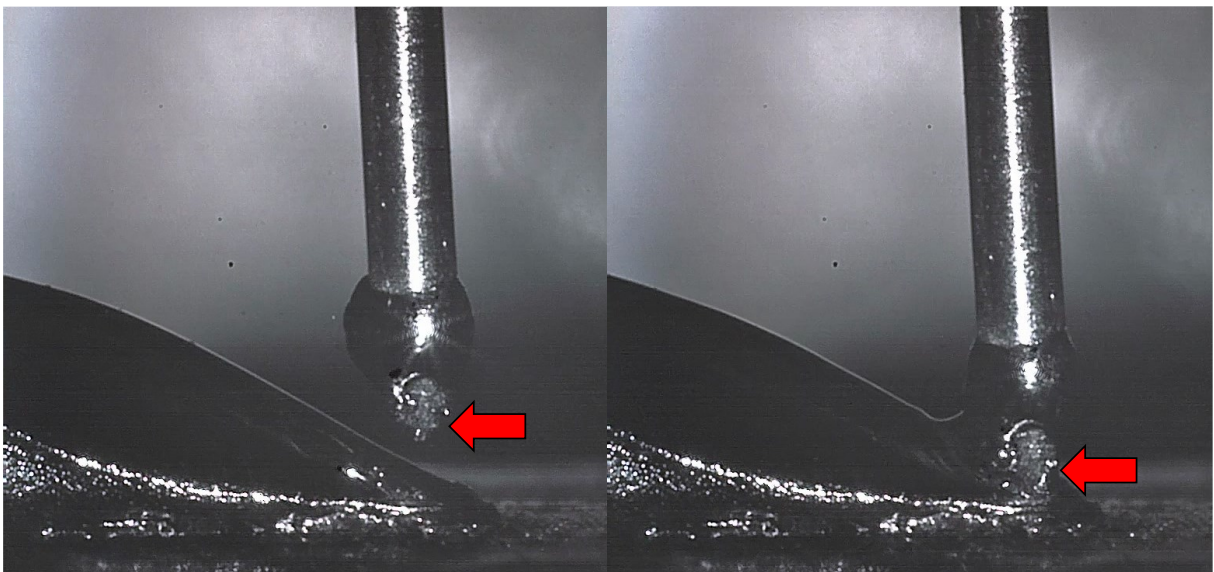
Solid core dives into welding pool. CMT variant.
